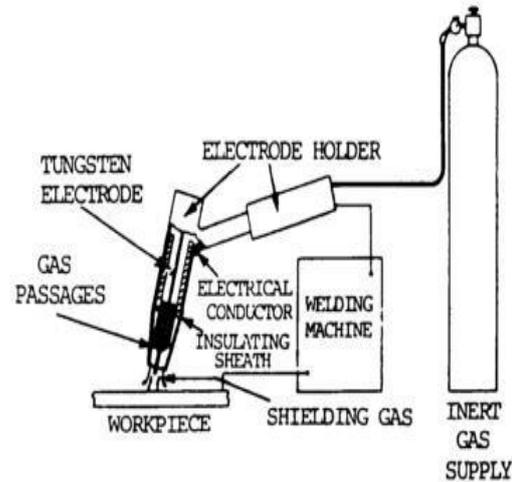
Schematic Diagram of TIG Welding
